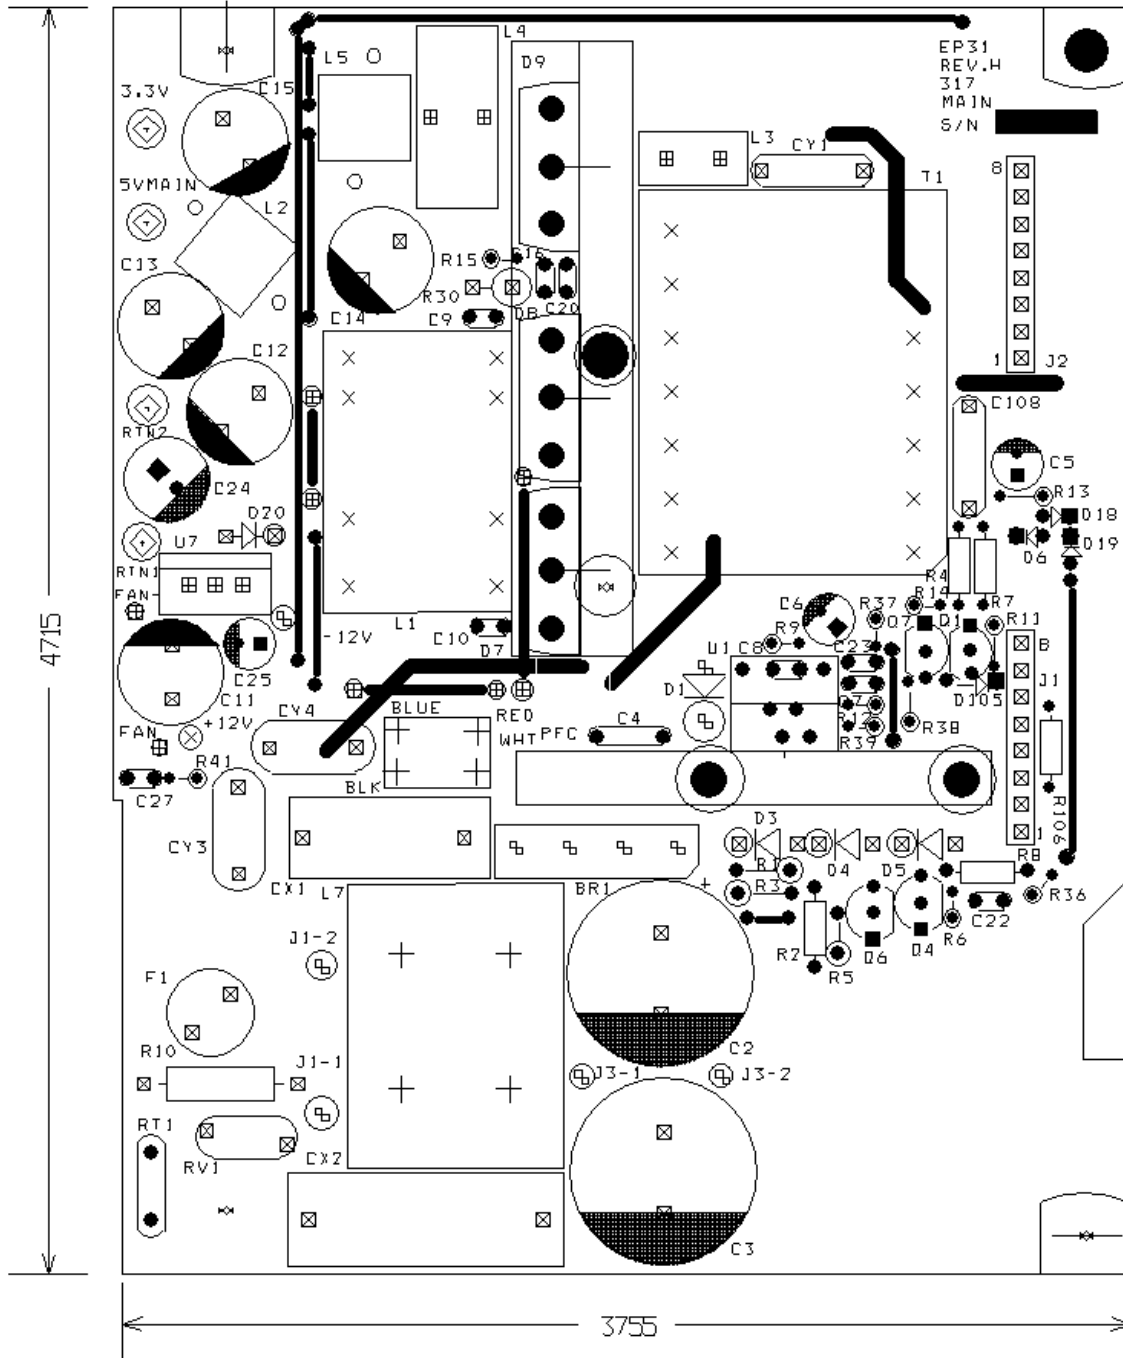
Main Board PCB Silk Screen Artwork (shows component locations).
